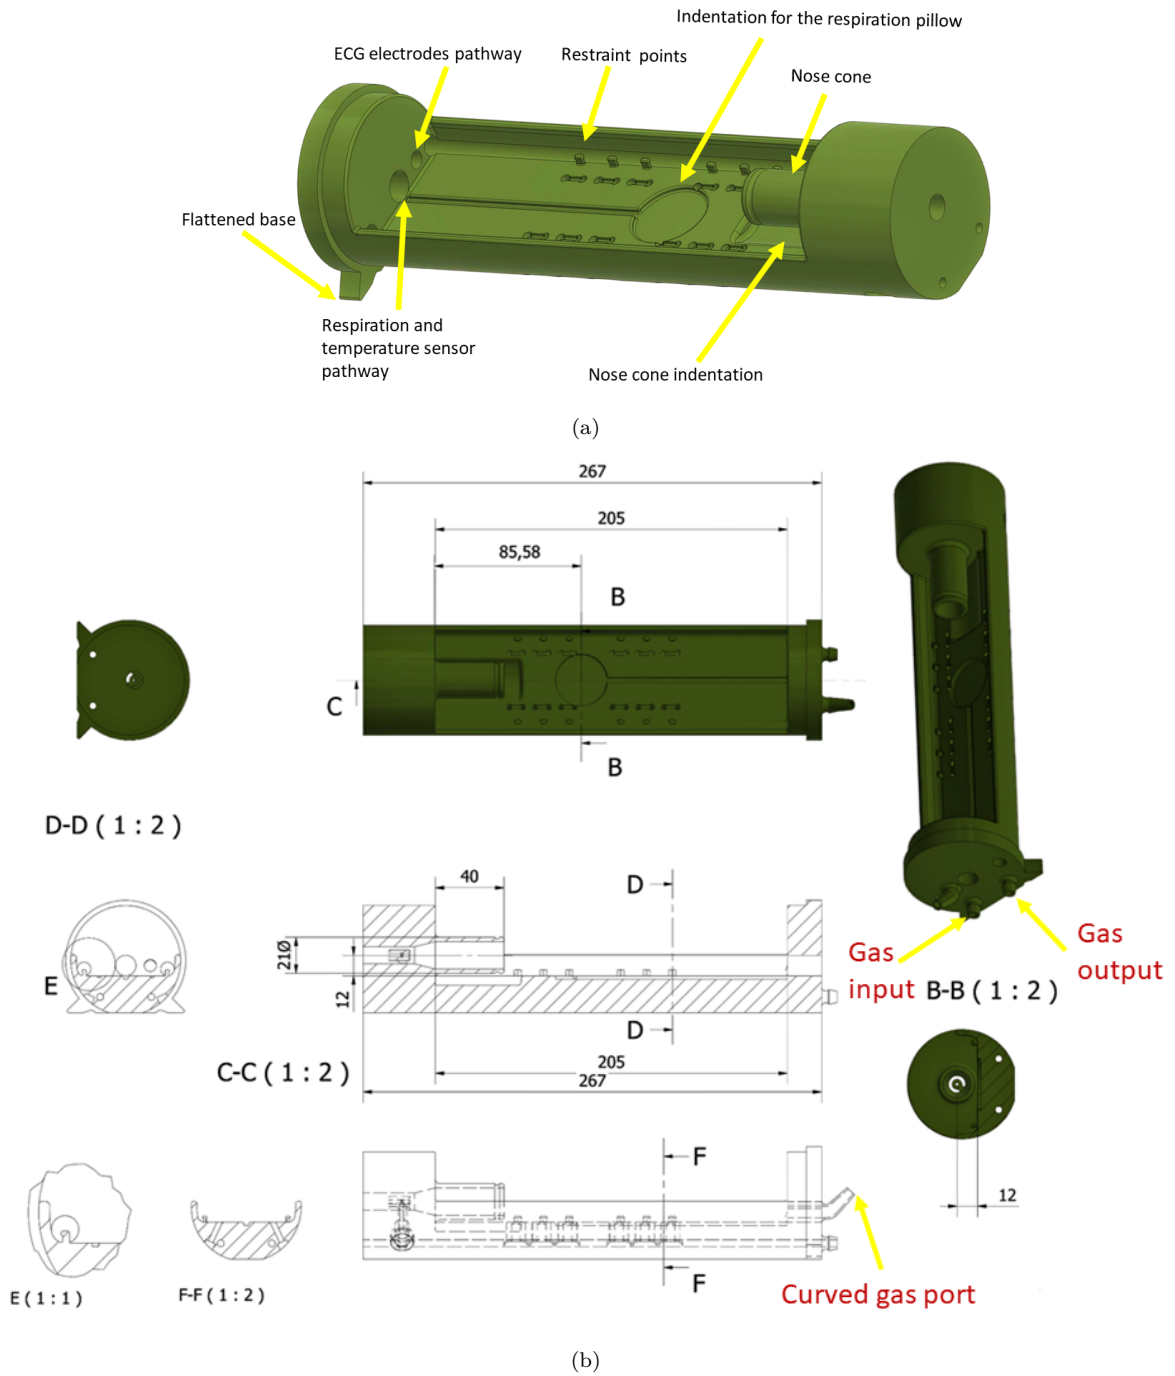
The second mouse holder design (version 2) is shown in (a) and (b).
